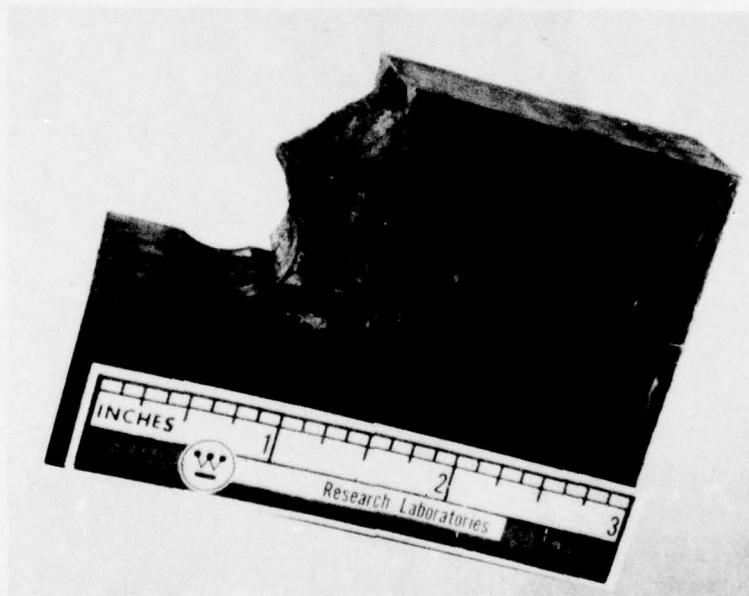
1T WOL weld specimen F-5 fracture (through arm)
